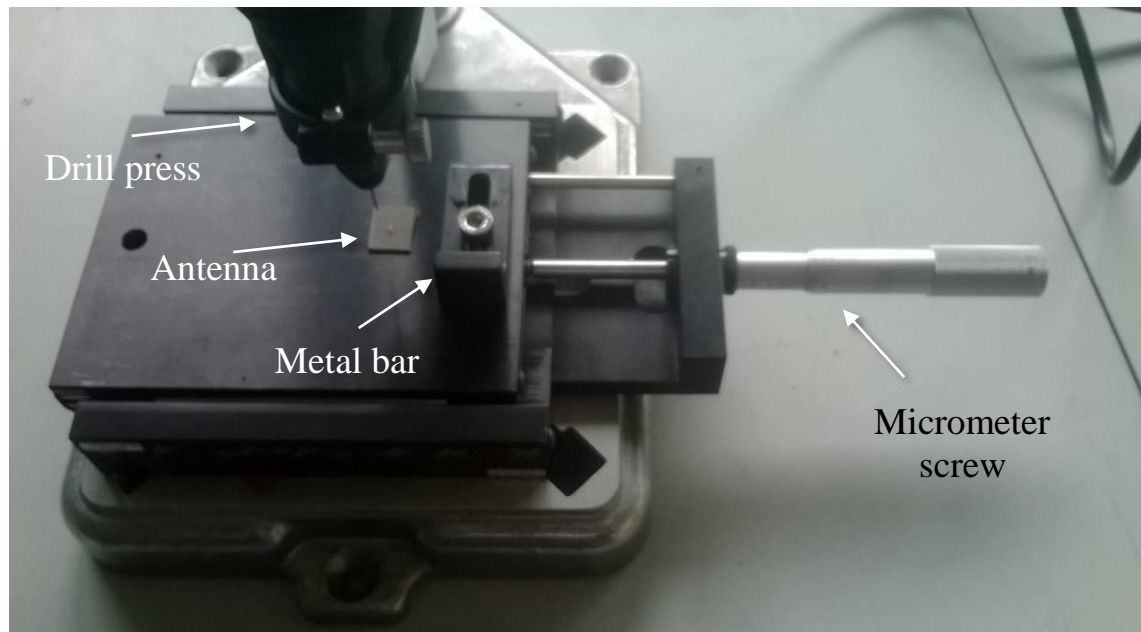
Configuration used to manufacture a hole through the patch antenna. The stand contained micrometer screw gauges, which were used to move the antenna and measure the position from the edges of the patch. The micrometer screw gauge was used to move the board accurately. The antenna also needed to be held in place using a metal bar, as a high level of accuracy was required to drill the hole in the correct spot.
